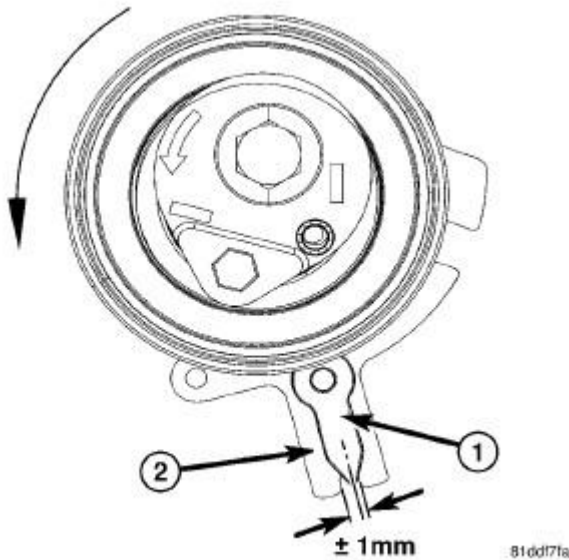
Tensioner Indicator & Tensioner Gage Slot
